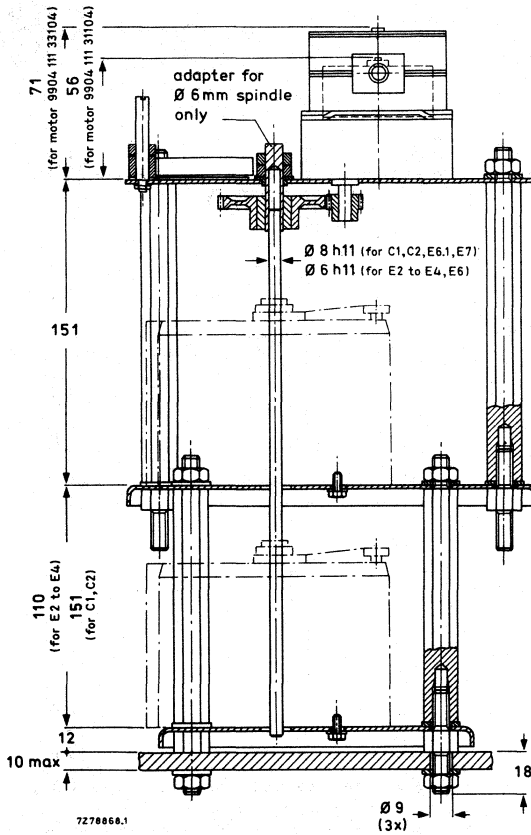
Motor drive for two ganged transformers with size code C1, C2, E2, E3, E4.
